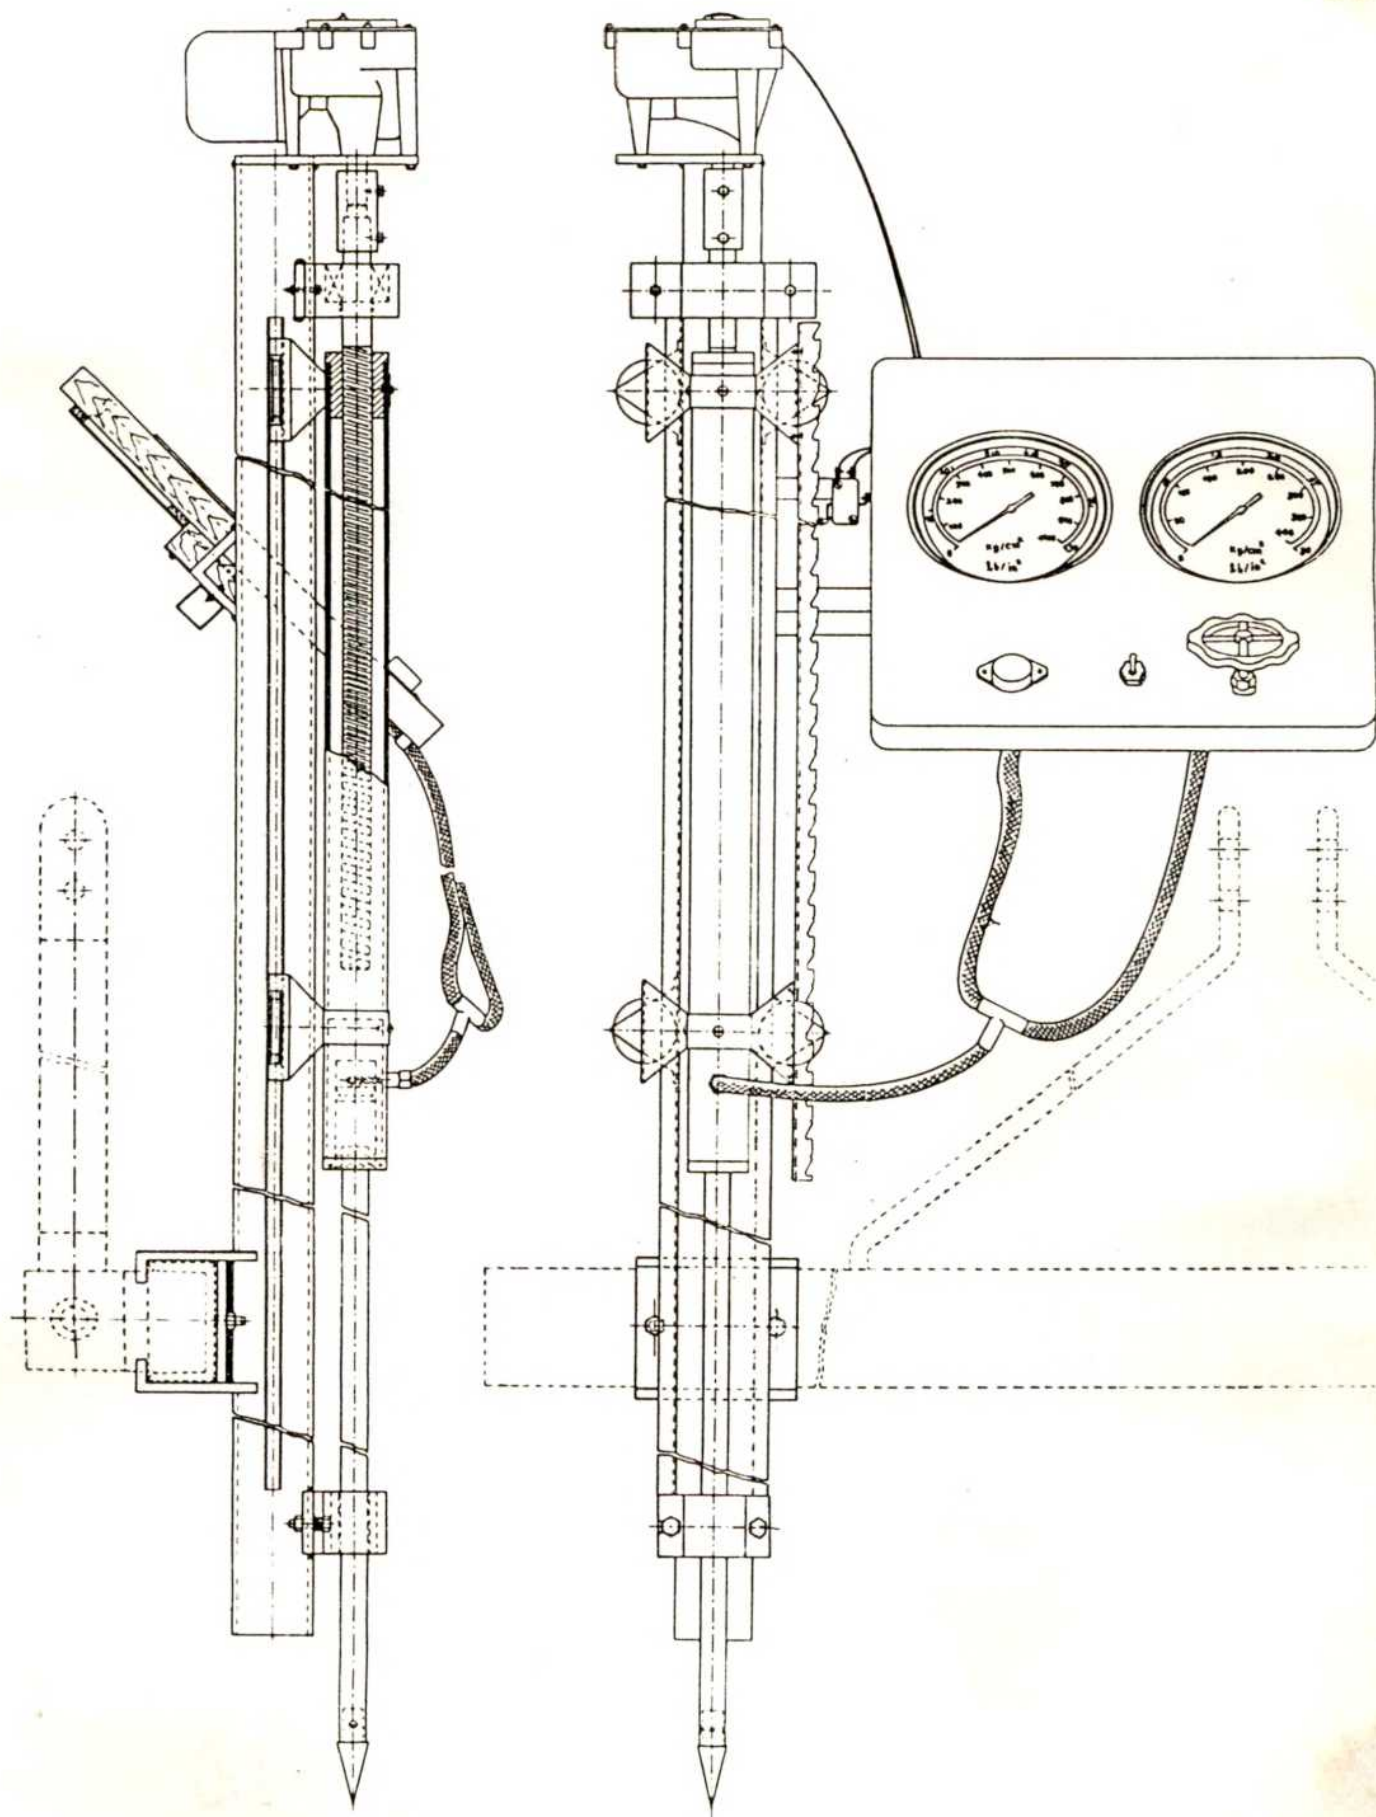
ASSEMBLED VIEW OF CONE PENETROMETER
